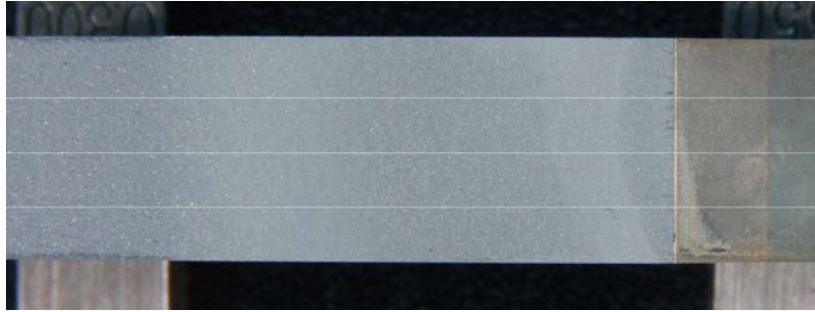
Fracture surface of Ti64+1B CT specimen demonstrating significant degree of tunneling.
